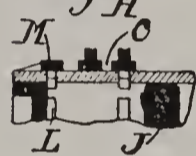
Inlets ports L closed by ring M, expansion taking place.
